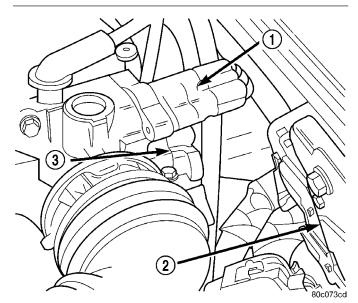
Idle Air Control (IAC) Motor and Throttle Position Sensor (TPS) Wiring Connectors
